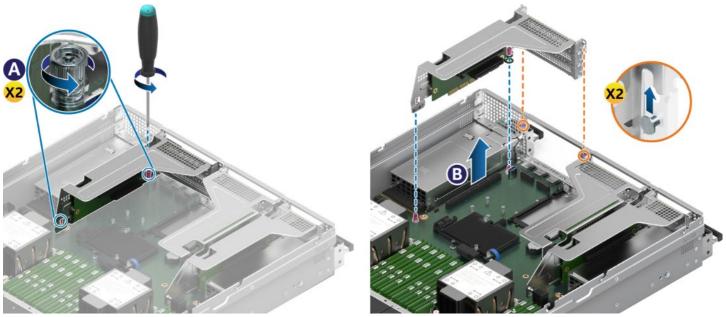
RAID Adapter Card Installation (Riser Card Assembly Removal)
